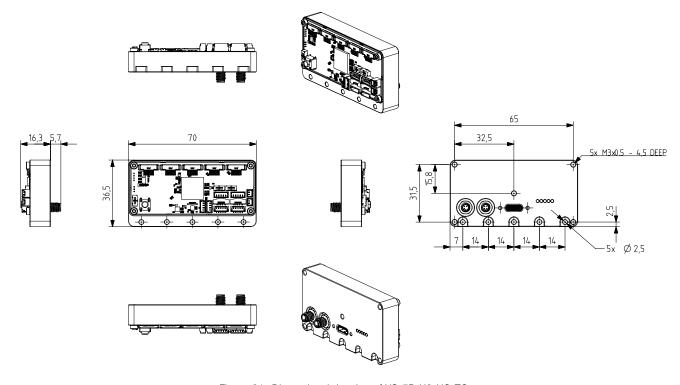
Dimensional drawing of XS-5P-U3-UC-TC
